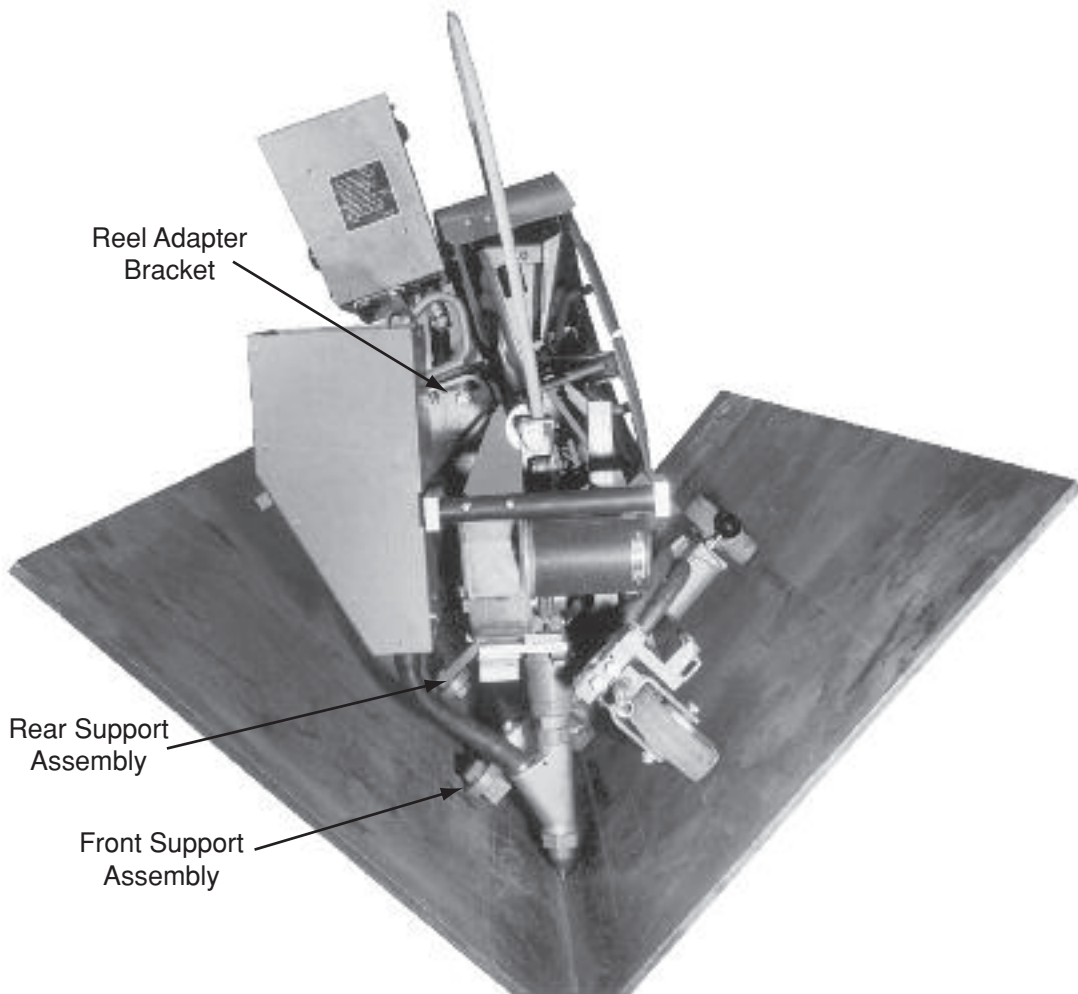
K229 FLAT FILLET KIT INSTALLED
